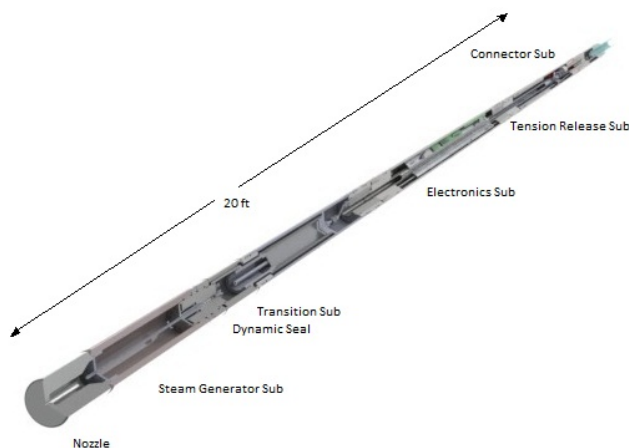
Cutaway rendering of field prototype bottom hole assembly
